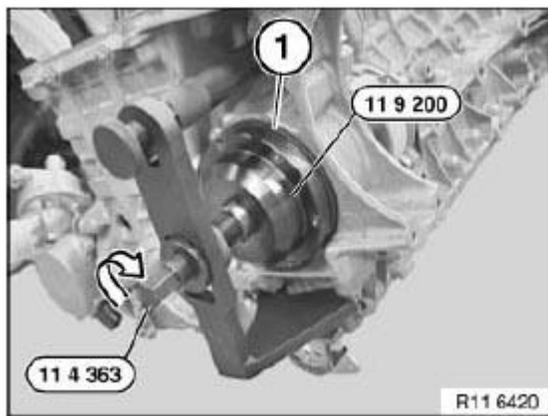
Mounting Sealing Cover With Special Tool 11 4 363
